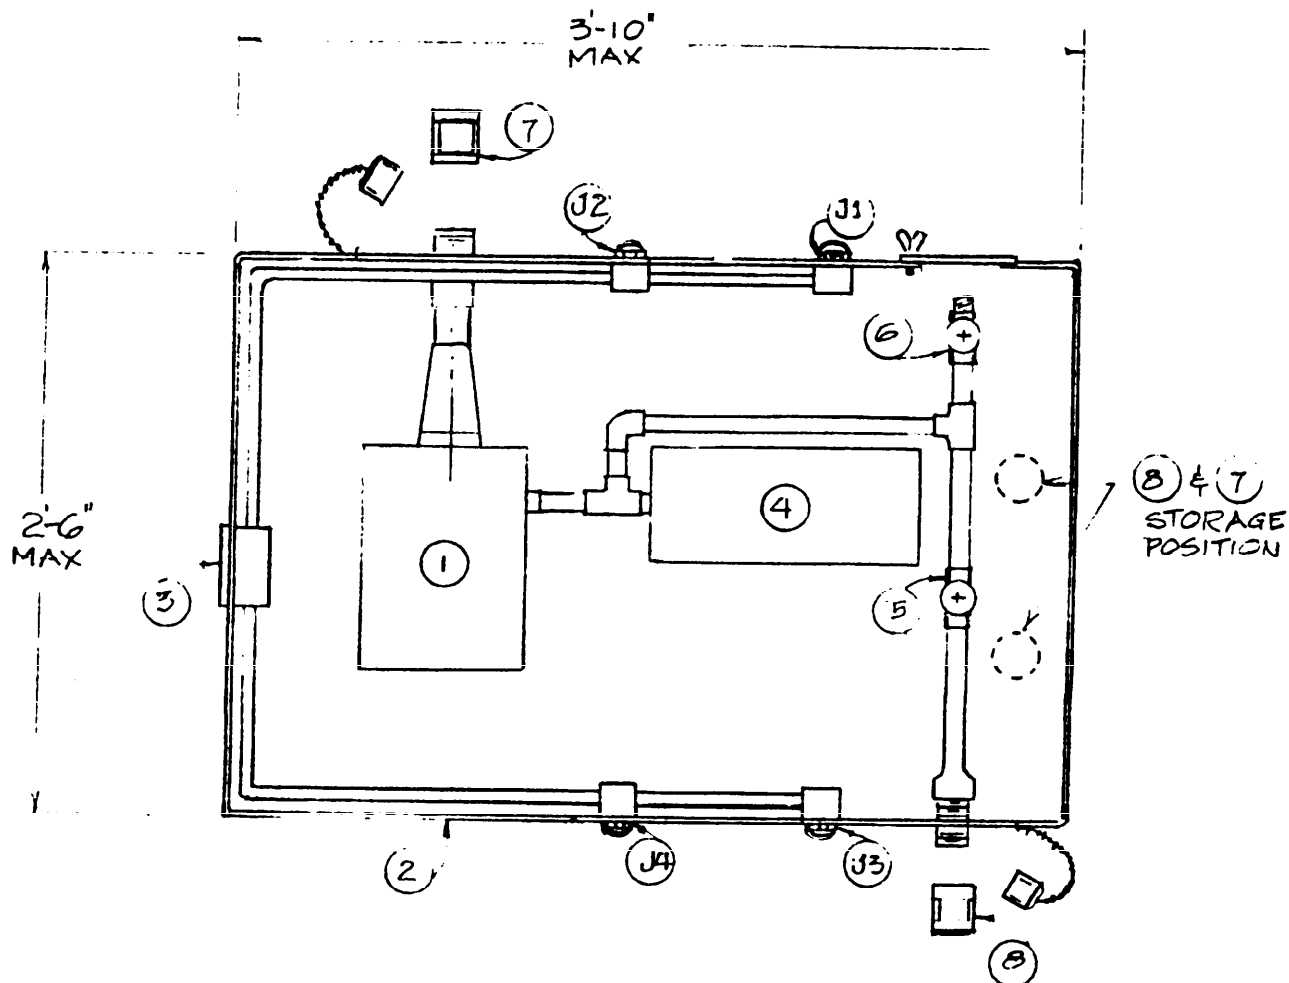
TYPICAL EQUIPMENT LAYOUT FOR PUMP UNIT.
